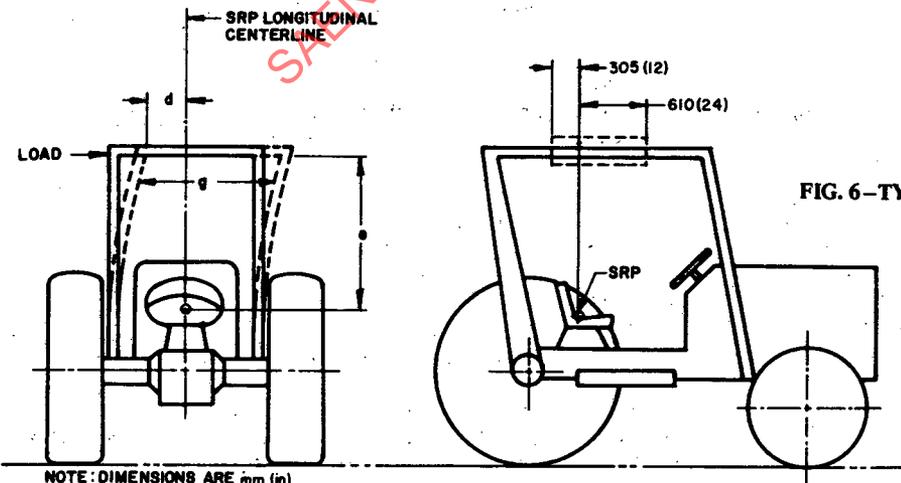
TYPICAL SIDE LOAD APPLICATION
